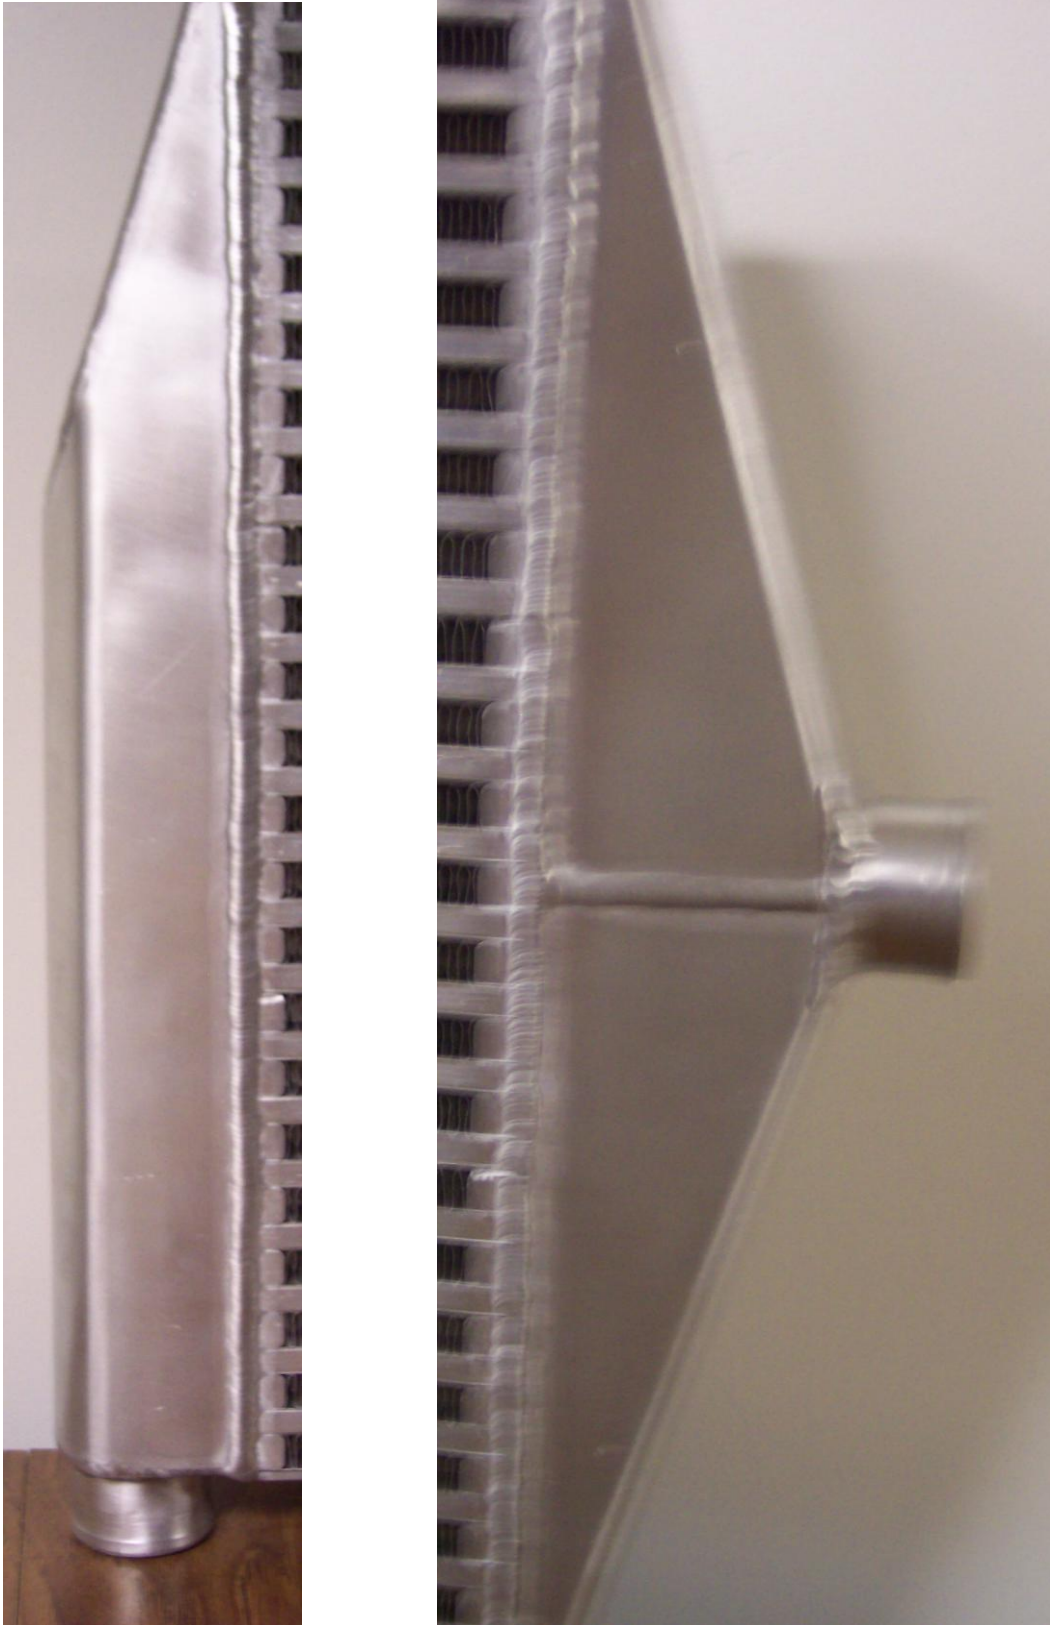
Close up of end tanks, inlet side (left) and outlet side (right).
